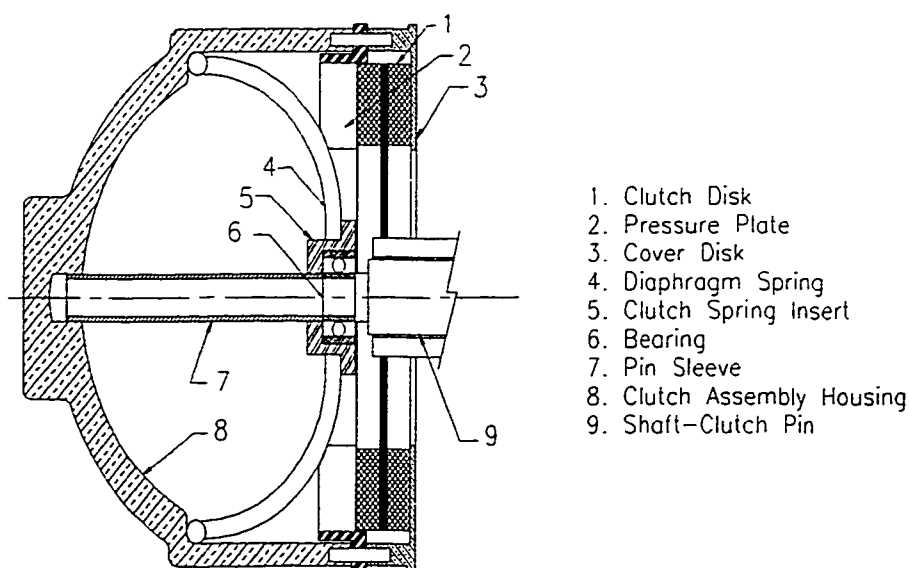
BMW Clutch Pin and Bearing Detail.
